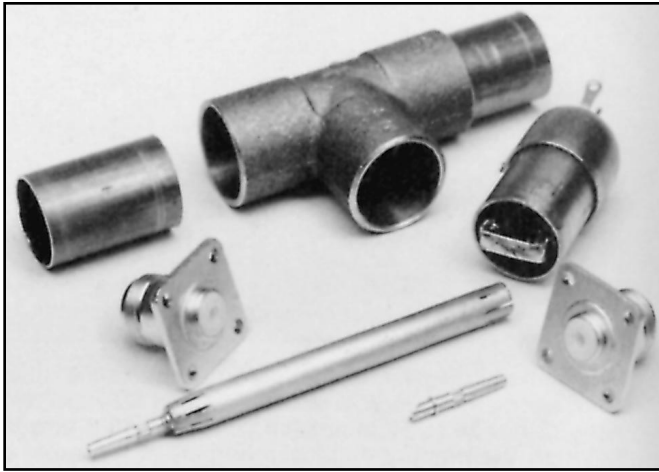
Major components of the line sampler. The brass T and two end sections are at the upper left in this picture. A completed probe assembly is at the right. The N connectors have their center pins removed. The pins are shown with one inserted in the left end of the inner conductor and the other lying in the right foreground.
